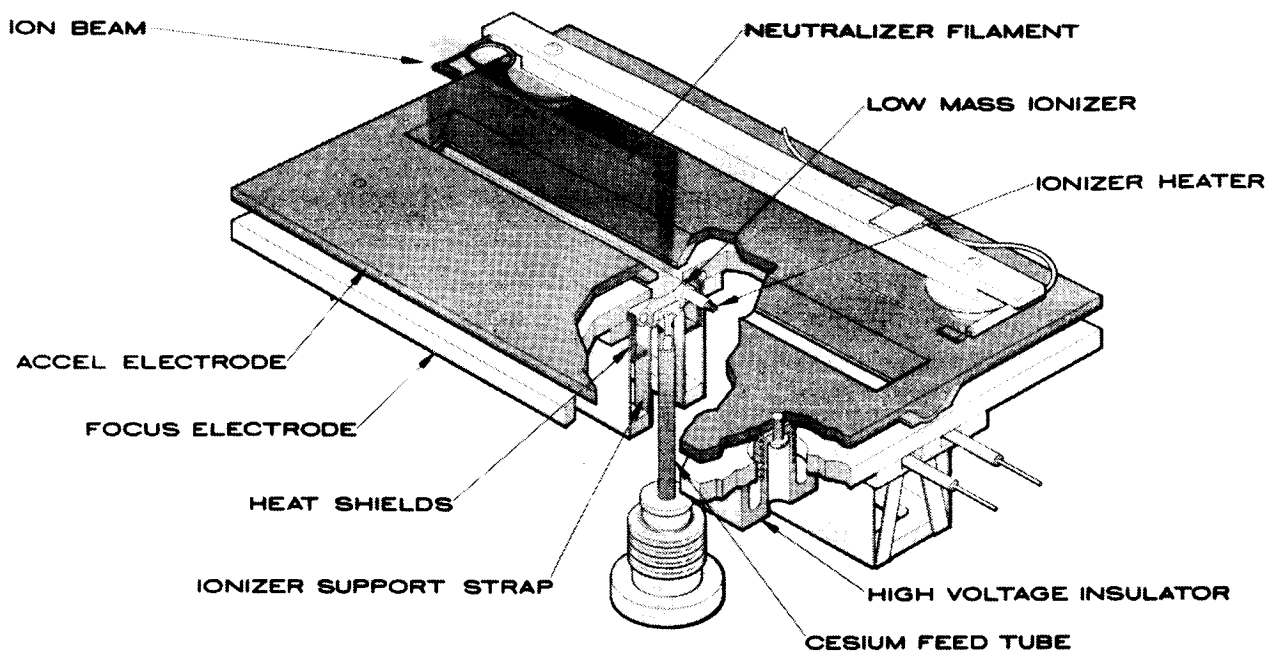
Isometric and cross-sectional drawings of the Hughes Linear Ion Thrustor.
